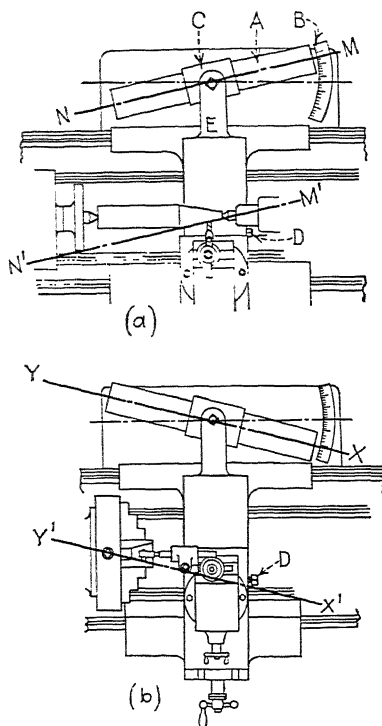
Using the taper attachment; (a) turning a taper; (b) boring a taper hole.
